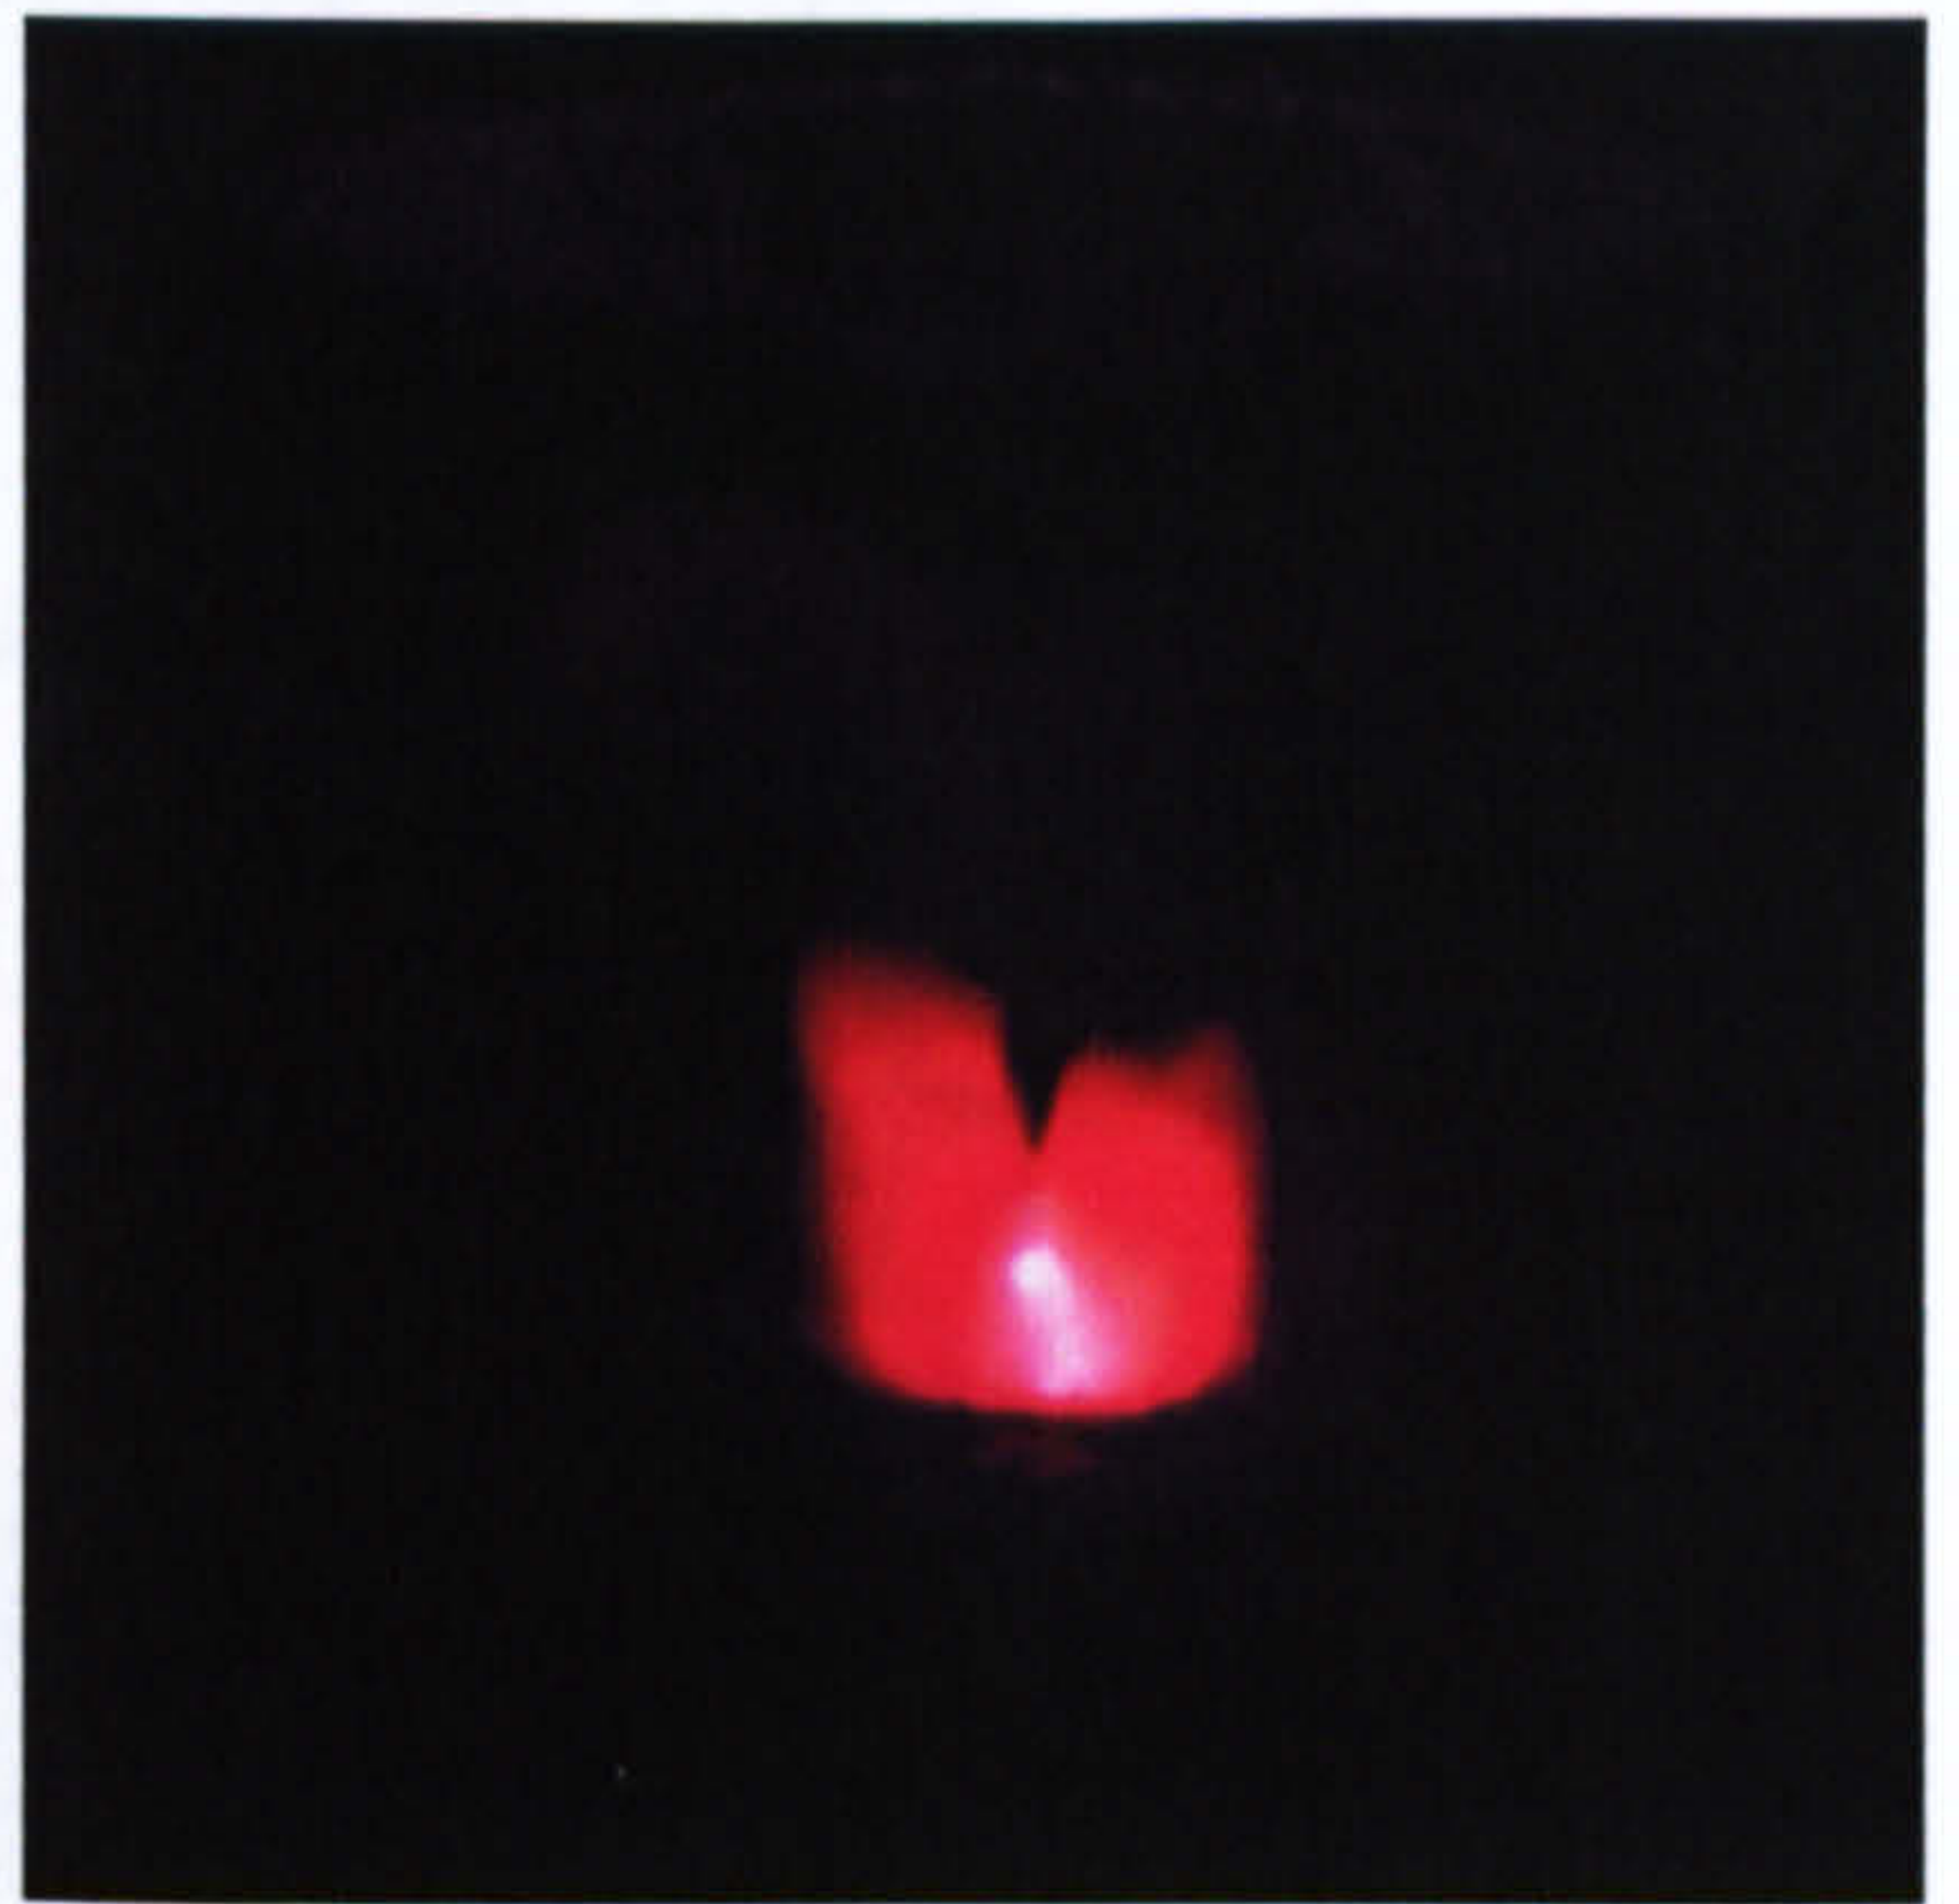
Dual torch welding (picture courtesy of Serimer-Dasa)
